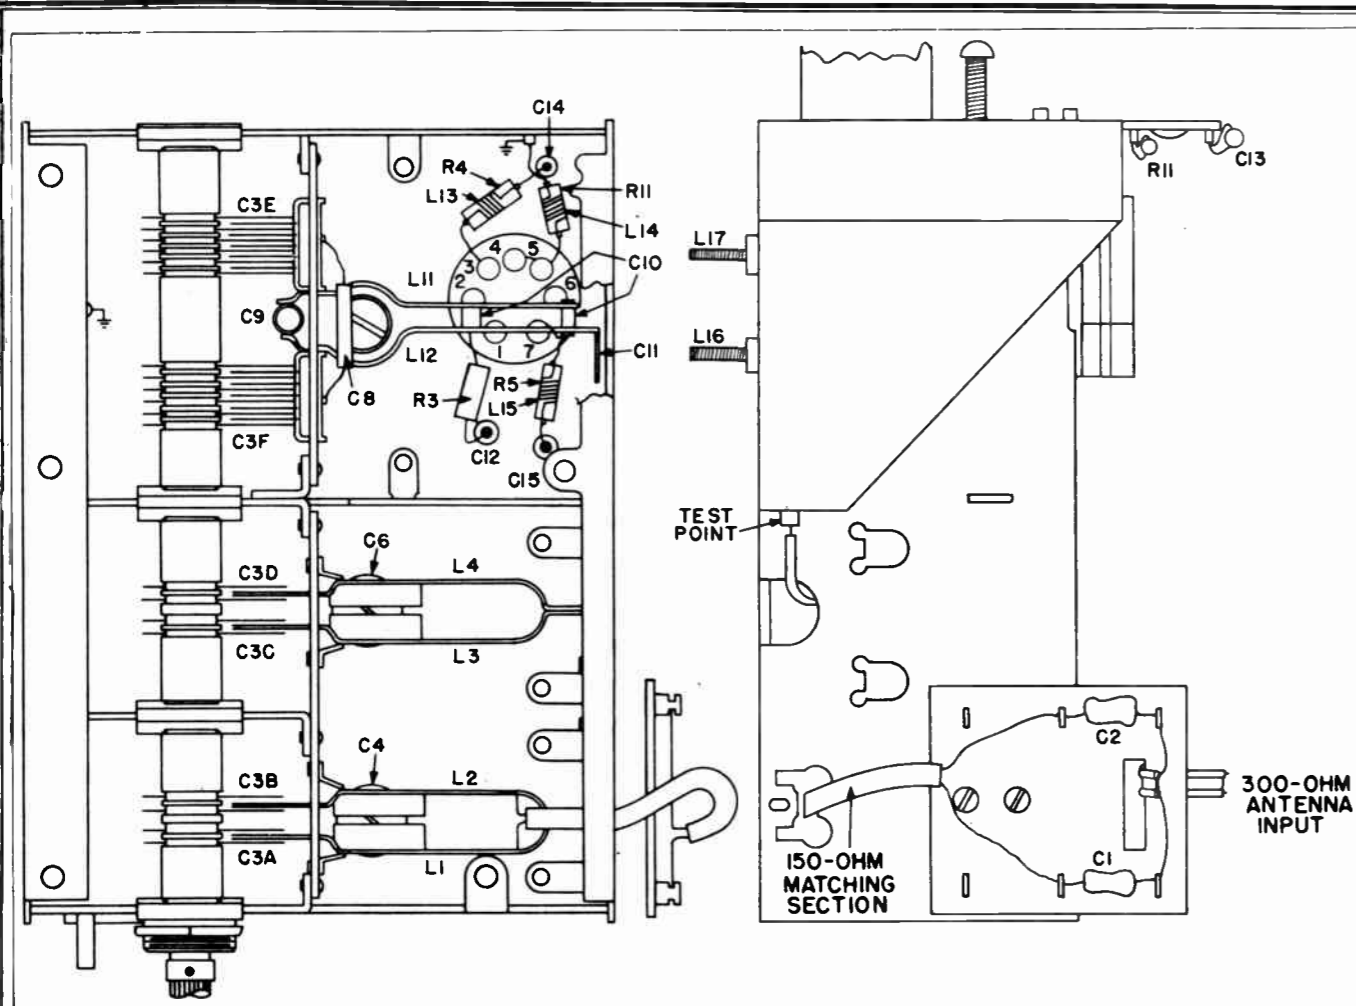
Base Layout of UHF Tuner-Adapter, with Oscillator and Mixer Boards Removed
